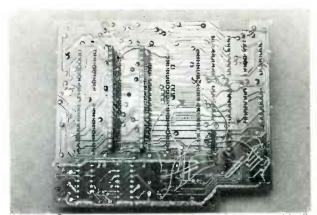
THE COMPLETELY-MODIFIED BOARD. Use this illustration as a guide while working on your own board. Leave as little slack in jumper wires as possible.
